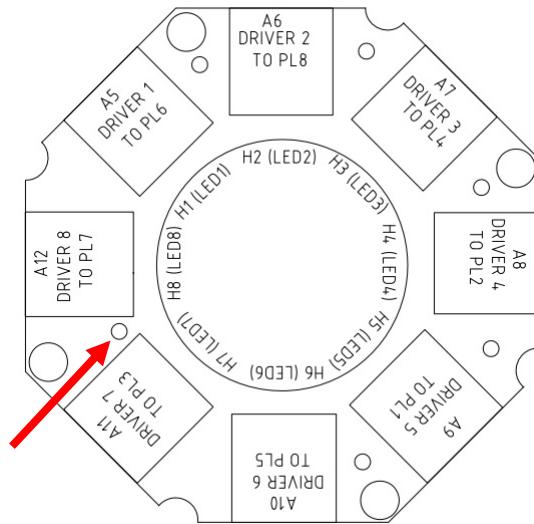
Assignment of strobe control cables to LED driver PCBs.
